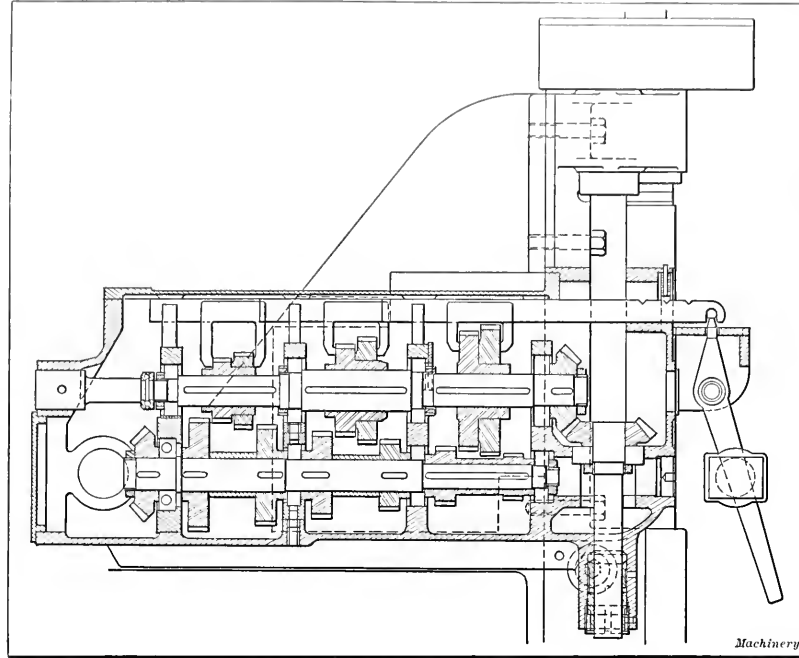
Speed Box on Baker Drill arranged for Right-angle Drive
